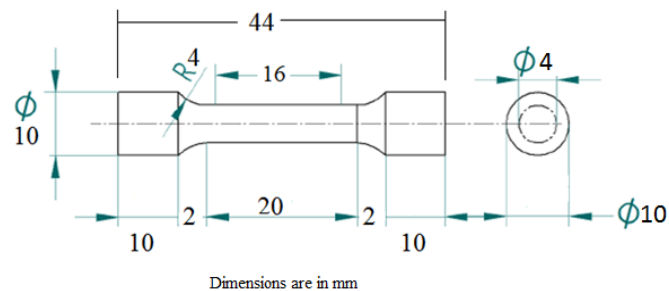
Tensile test specimen dimension as per ASTM-E8
